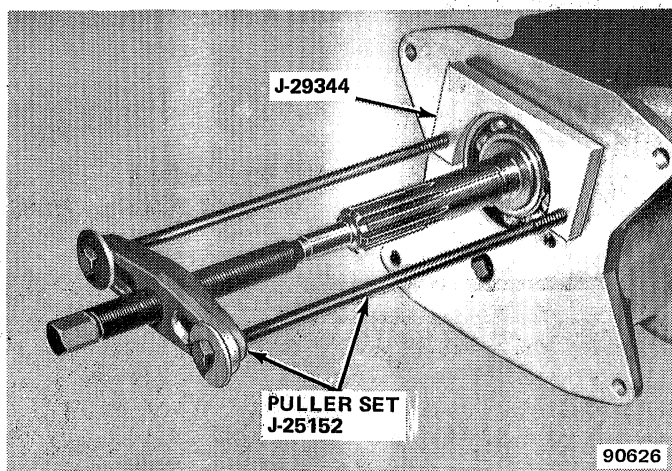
B-55 Clutch Shaft Front Bearing Removal
